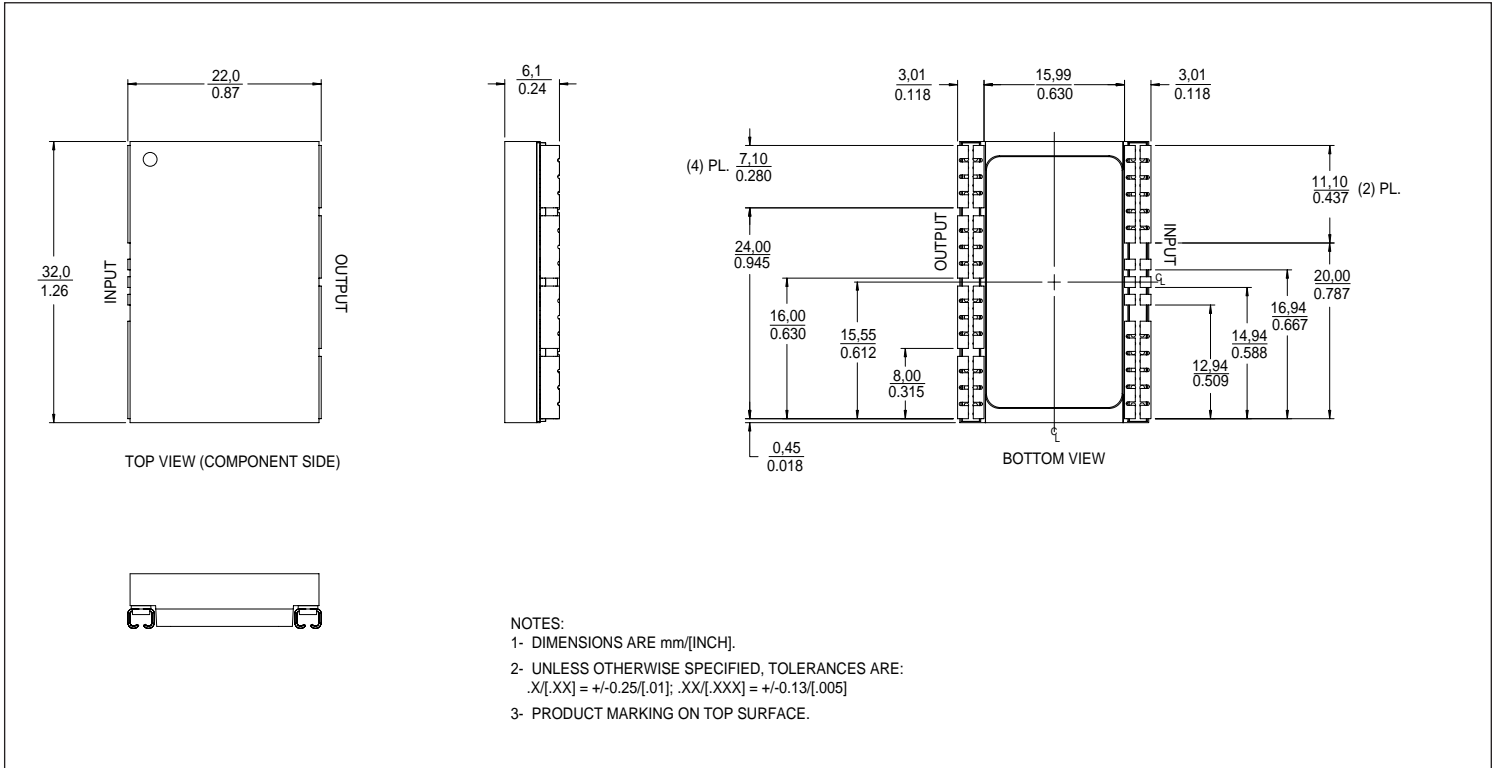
BCM J-Lead mechanical outline; Onboard mounting
